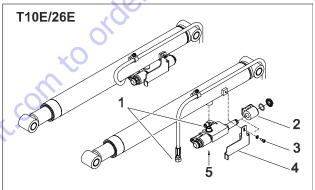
Jib Cylinder Holding Valve - Removal/Installation
